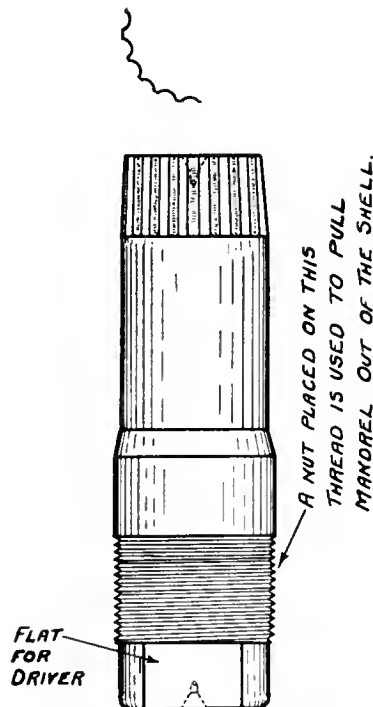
MANDREL USED IN ROUGH TURNING OPERATIONS ON "LO-SWING" LATHE.
